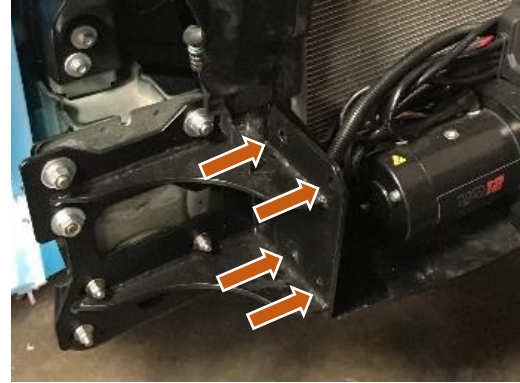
Aluminum Bumper to Winch Tray Mounting Locations
